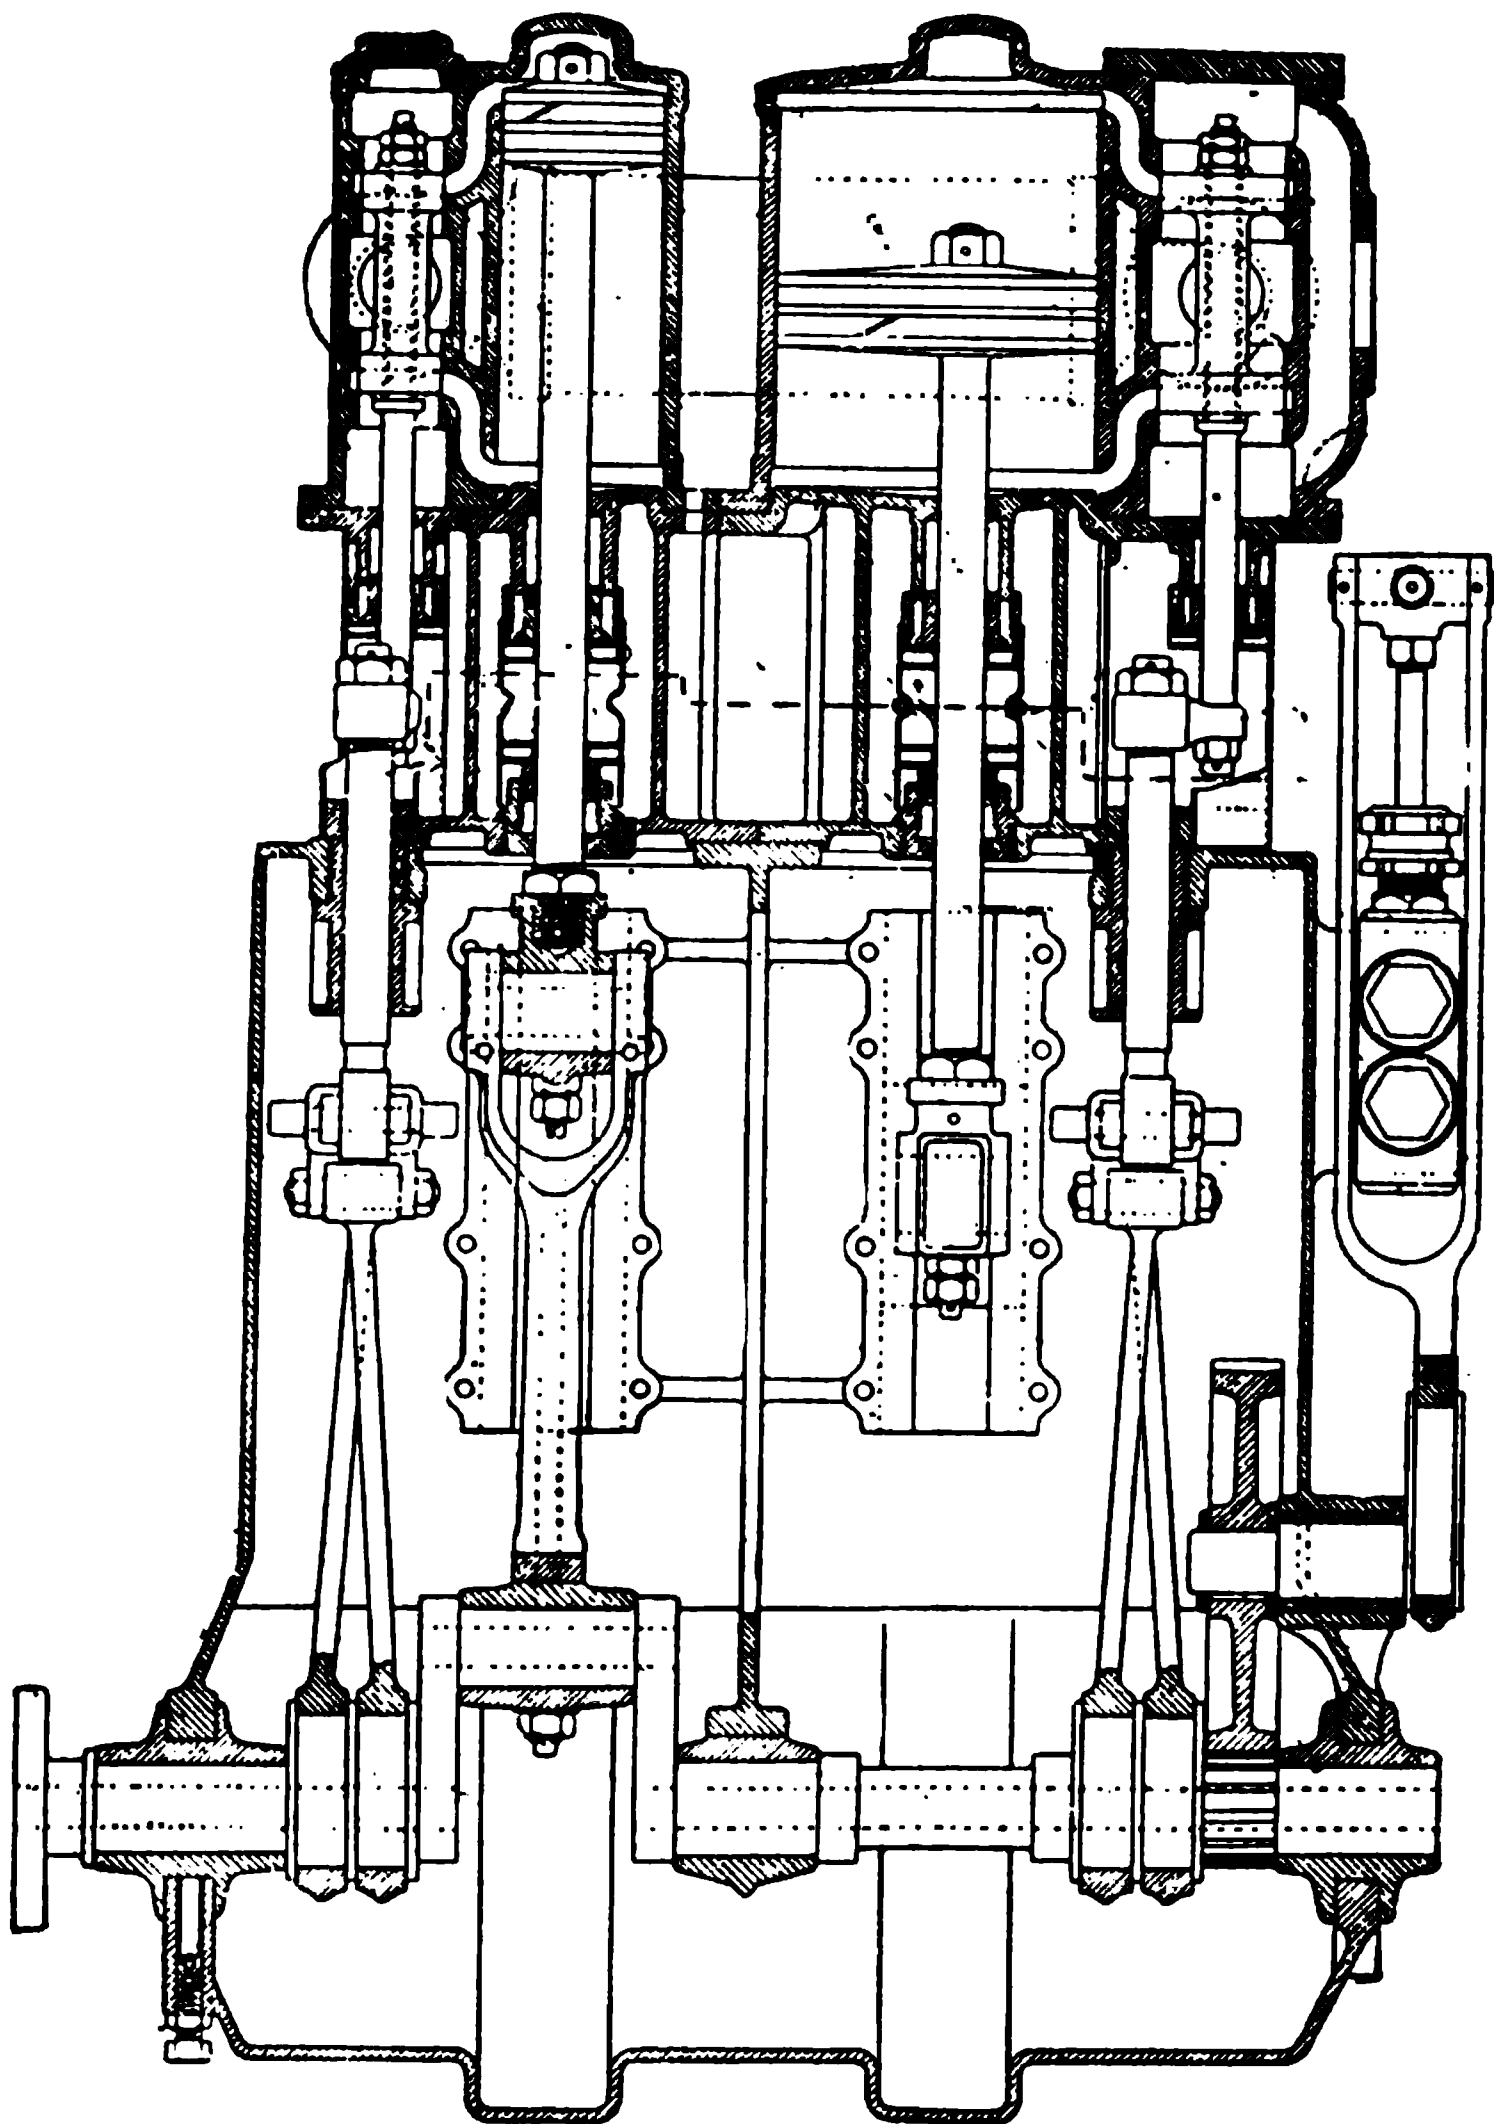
The "Lifu" Compound Steam Engine for heavy vehicle use. This section is drawn through the centre of the cylindrical steam chests, which, as in the Thornycroft engine (Fig. 278), are below and at the sides of the steam cylinders. The appearance of eccentricity in the attachment of the piston rods may thus be understood.
